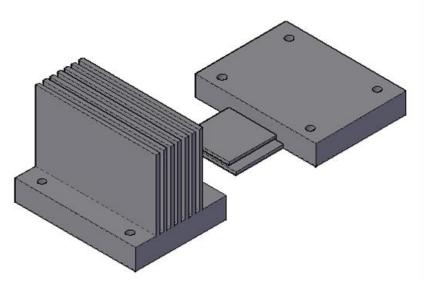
SolidWorks Design for TEG Test Fixture (Phillip Pezzopane)
